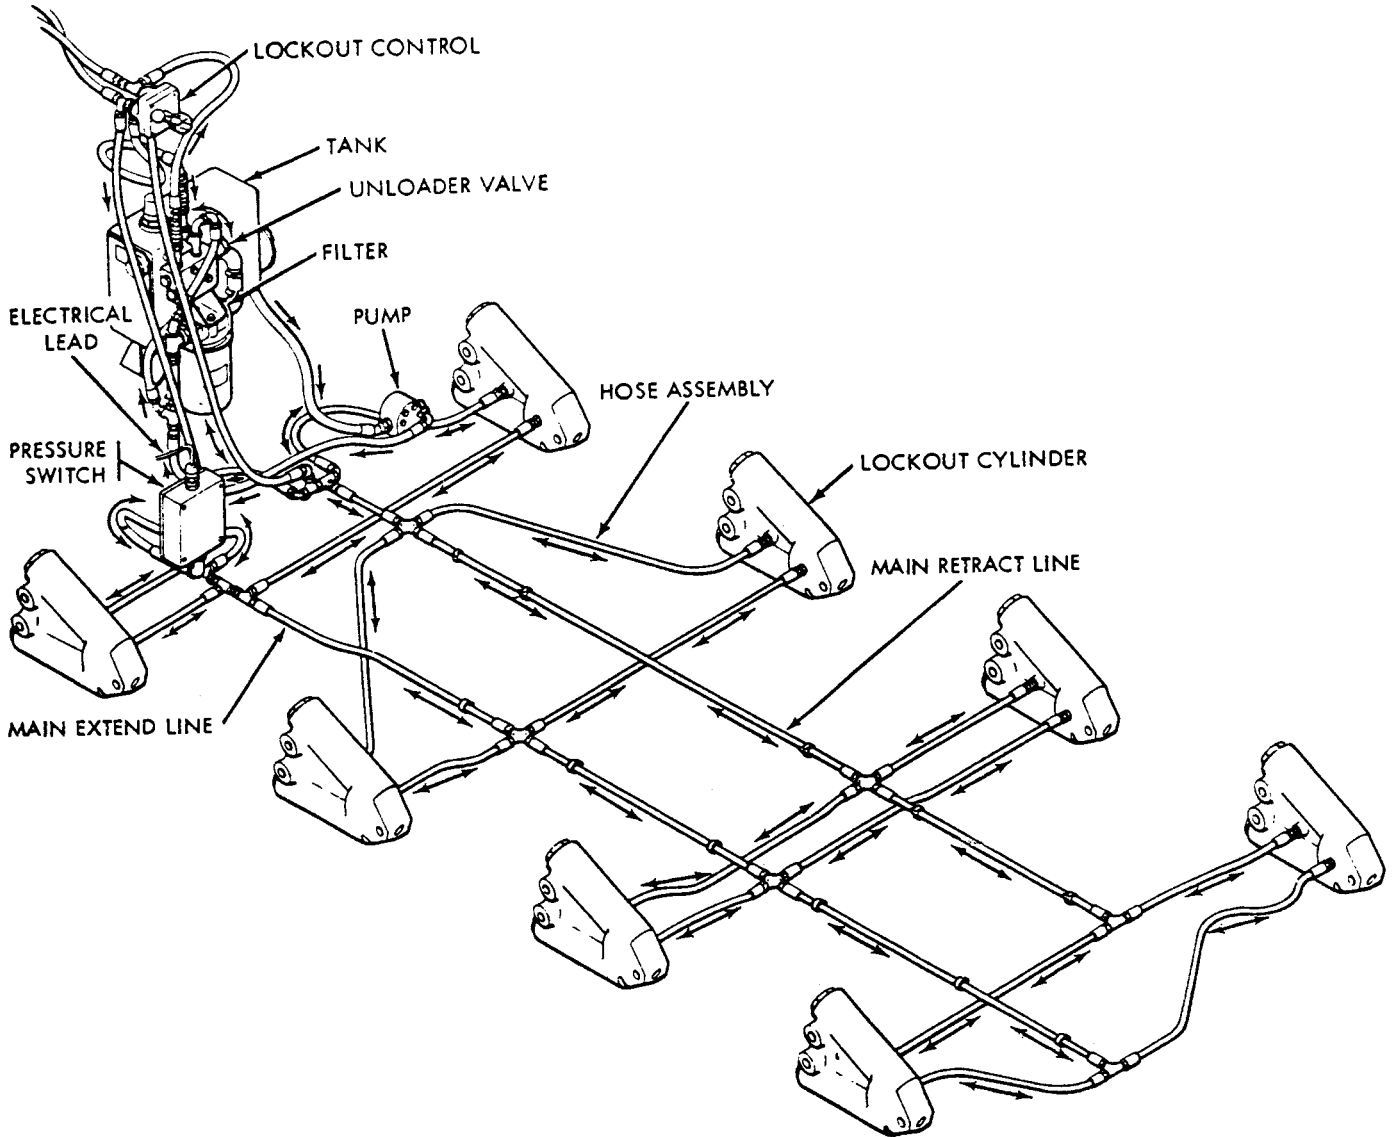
Suspension Hydraulic Lockout System (M741)
